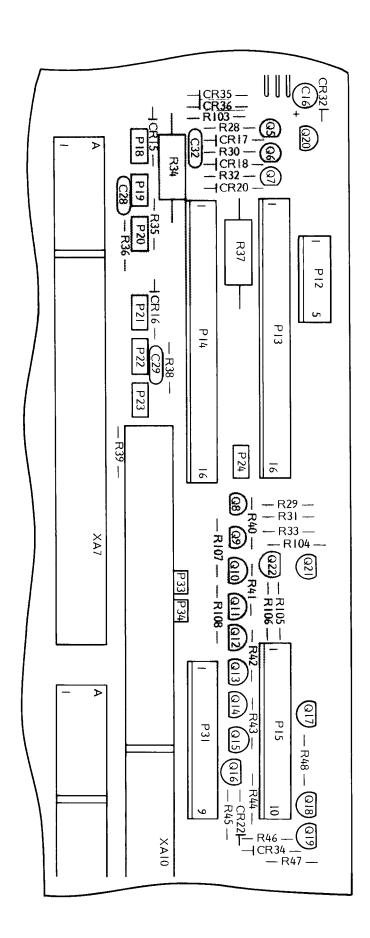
A6 Het/YIG Driver PCB (Assy. 660-D-8007) Block Diagram
